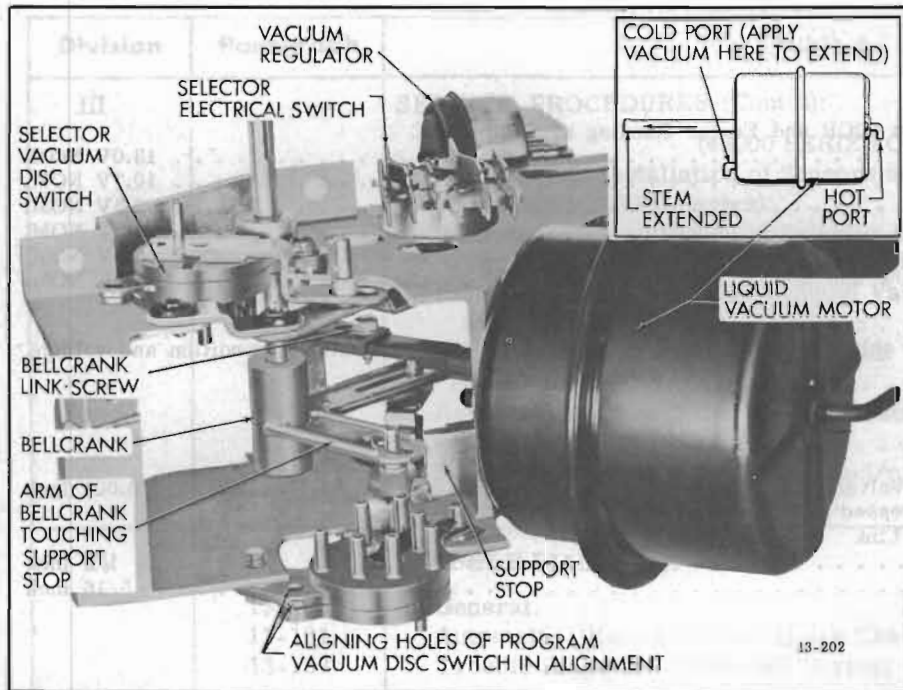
Liquid Vacuum Motor with Stem Extended (45-46-48000 Series)
